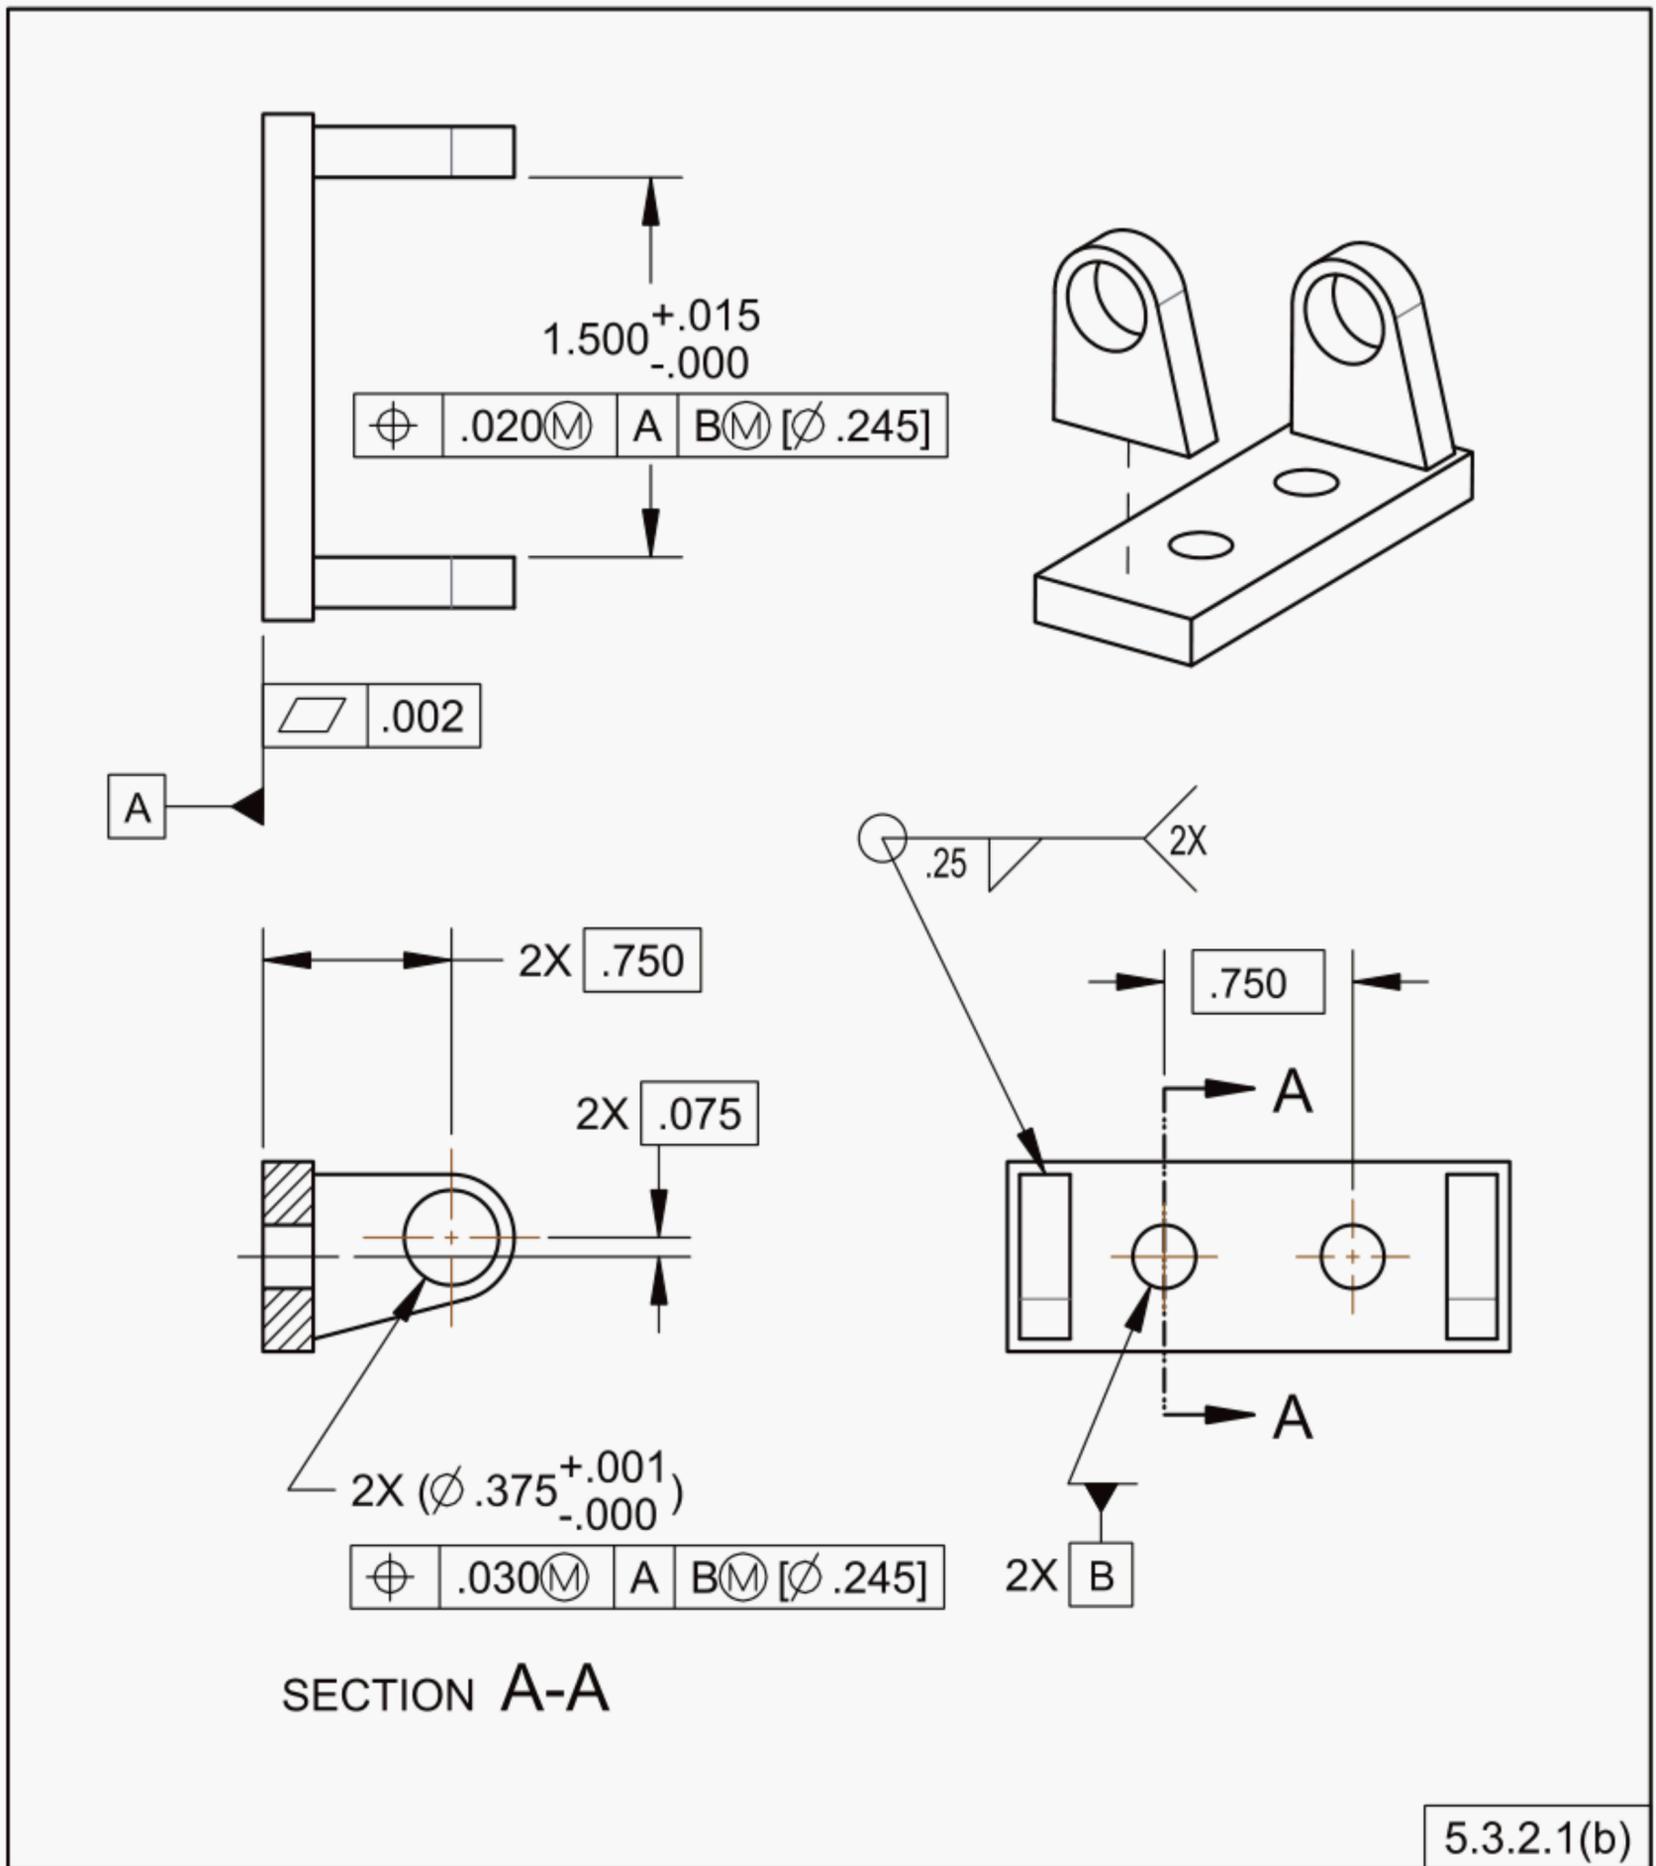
Aggregate Datum With Inherent Motion in the Assembly
